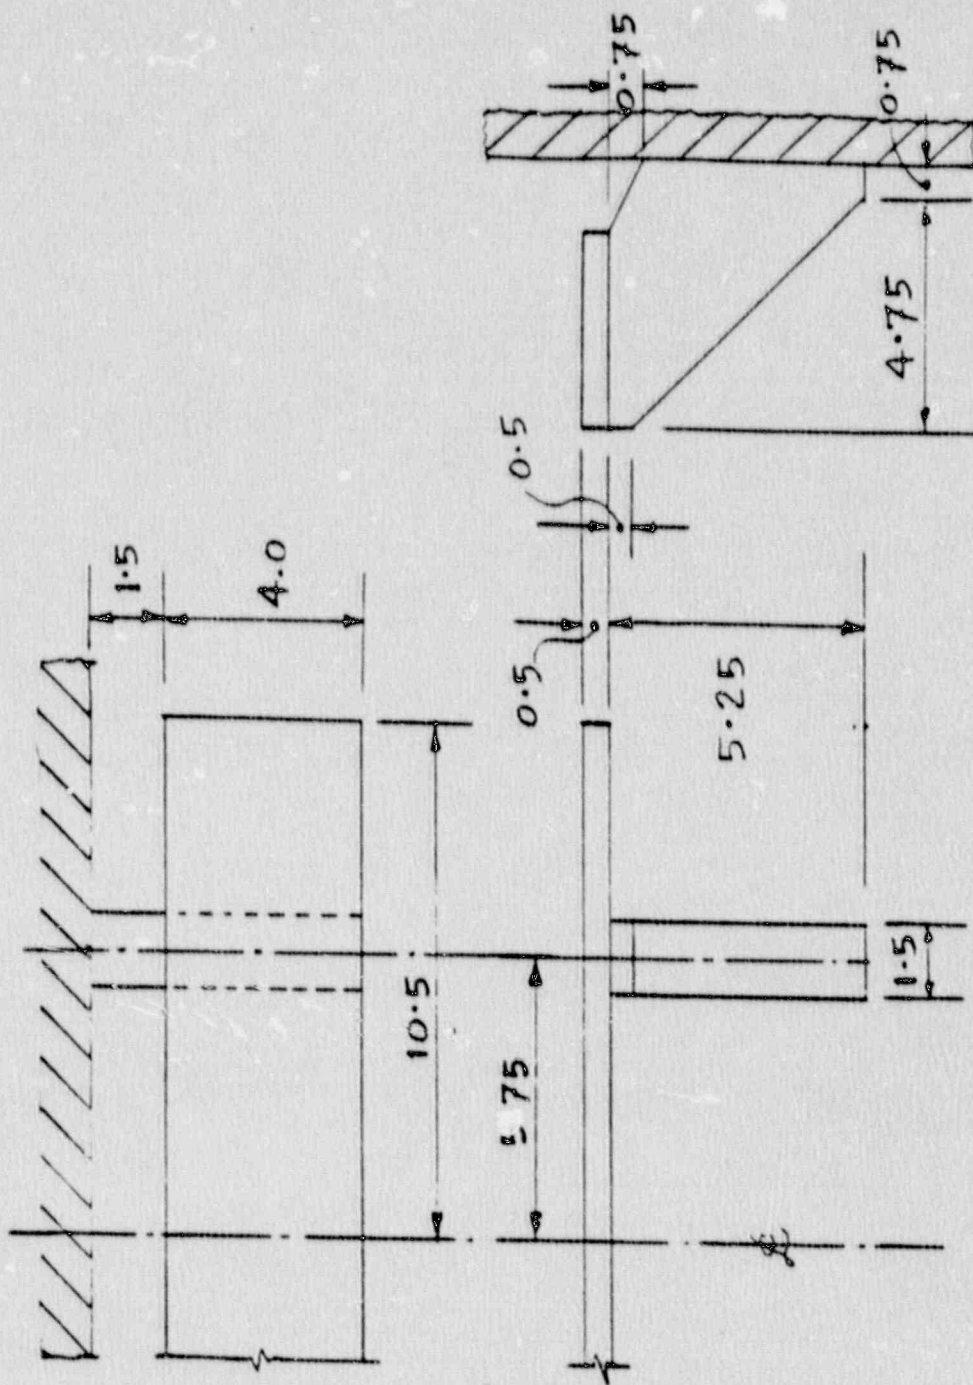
EXISTING BRACKET CONFIGURATION
